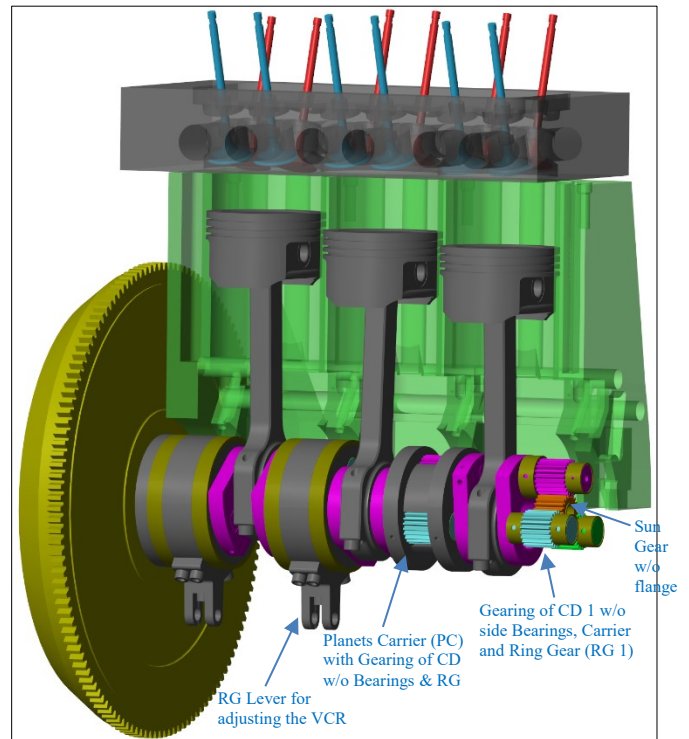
Some inward details of the 3L crank mechanism, such as the internal Gearing of CD 1 and the Planet Carrier (PC 2) and inner Gearing of CD 2.
